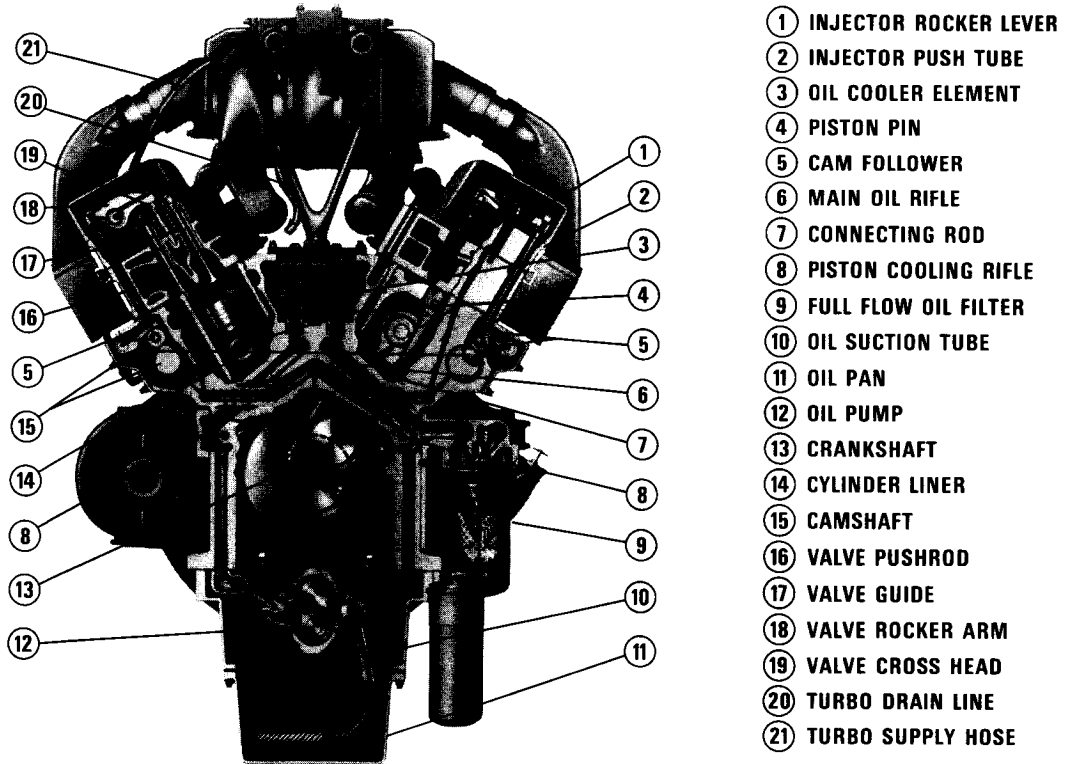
, (LWC-35). Front view standard lubricating oil flow — KT(A)-2300 Engine
